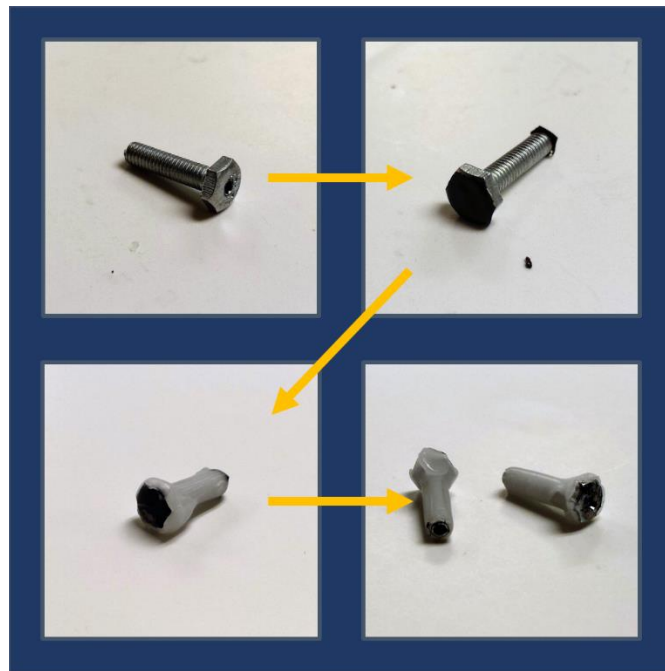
Steps for building optical probes. Top Left: modified bolt; Top Right: holes covered with electrical tape; Lower Left: after dipping in wax; Lower Right: after removal of tape.
